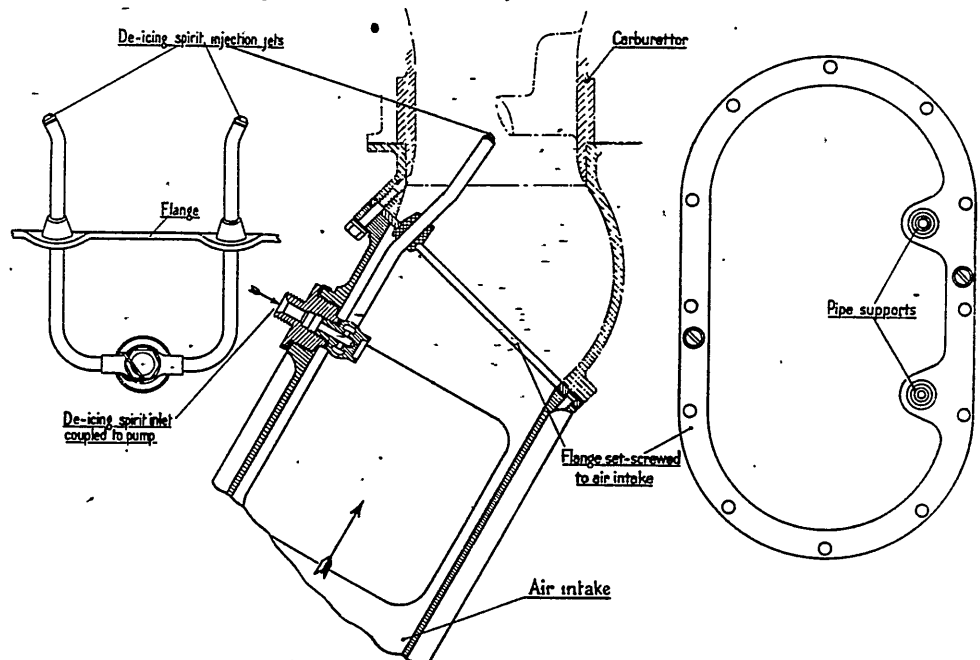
Arrangement of de-icing spirit injection jets in aero-engine air intake
